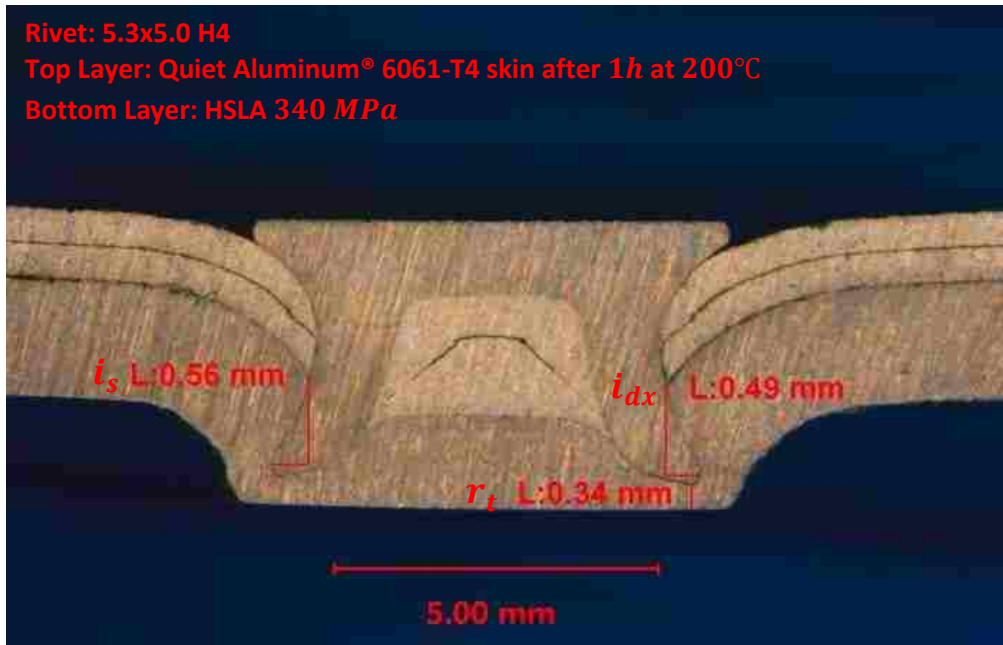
Microscope image on the cross section of the SPR joint with Quiet Aluminum® (6061-T4 skin after 1h at 200°C) and HSLA steel 340 MPa using flat die and 5.3x5.0 H4 rivet. The measurements in red indicate the inspected parameters of the joint, which showed proper interlocking and symmetry.
